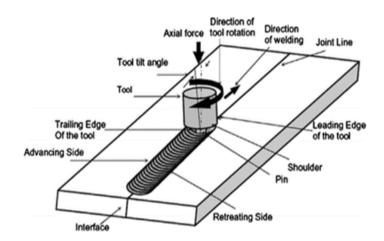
Schematic Diagram of Friction Stir Welding Process [1]
